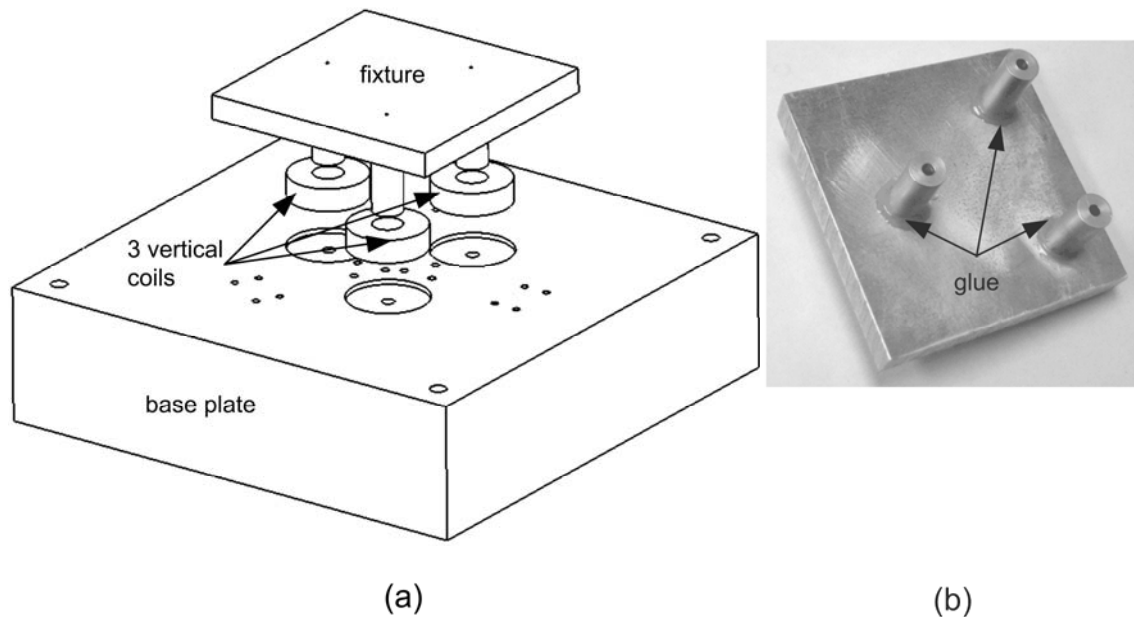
Tooling for mounting vertical coils to the base plate.
